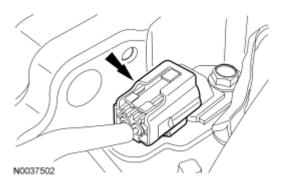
Locating Turbine Shaft Speed (TSS) Sensor Electrical Connector Courtesy of FORD MOTOR CO.
